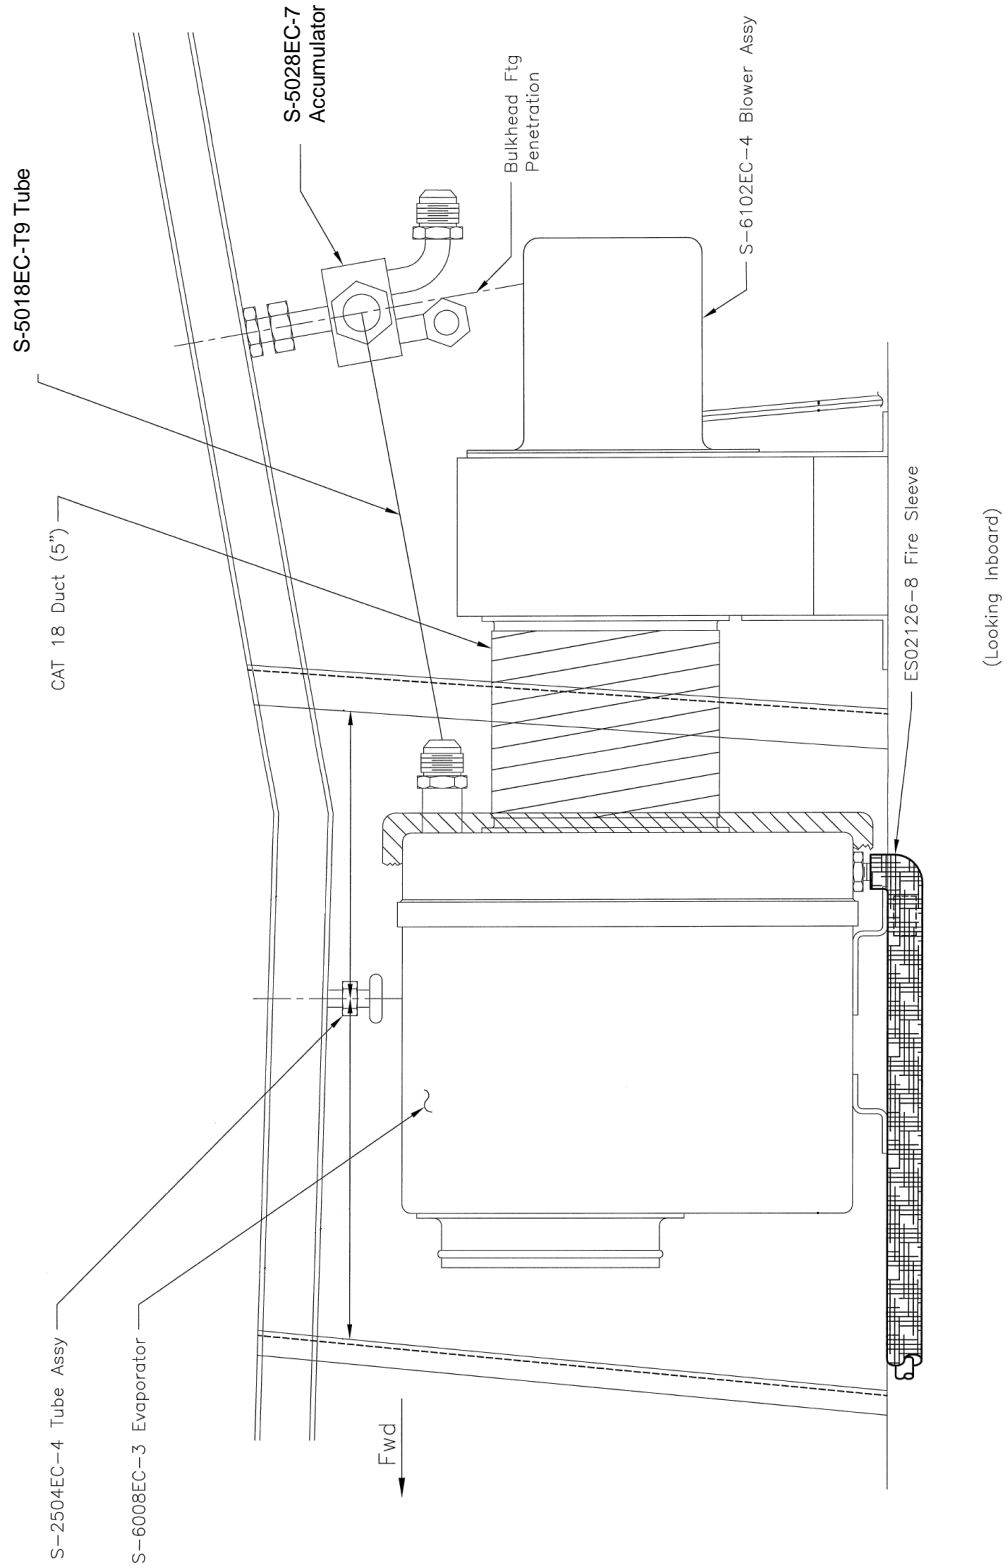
Aft Evaporator & Aft Evaporator Blower Assembly Installation (View looking in from aircraft left)
